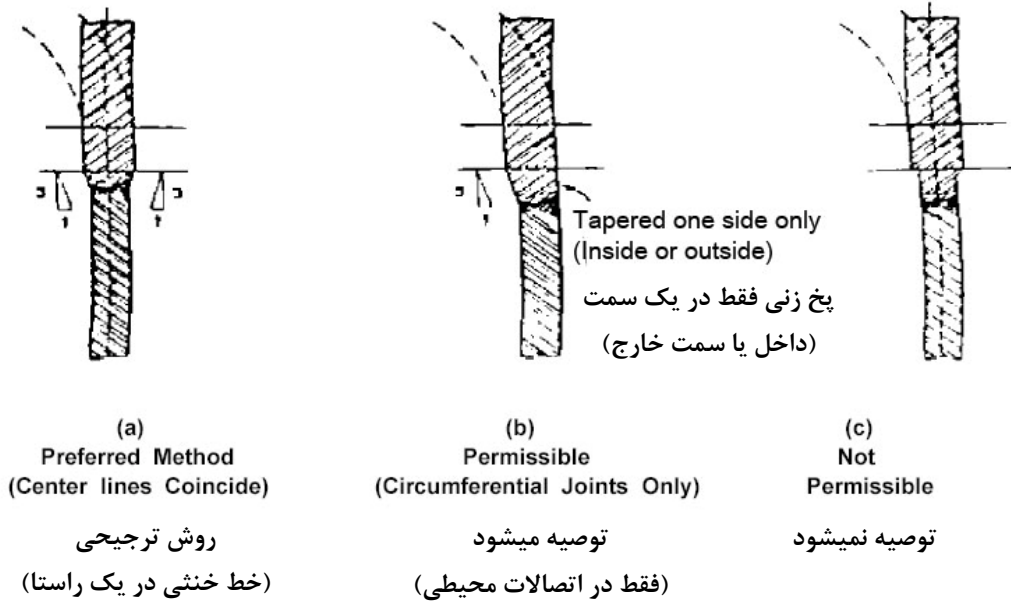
BUTT WELDING OF PLATES OF UNEQUAL THICKNESS
